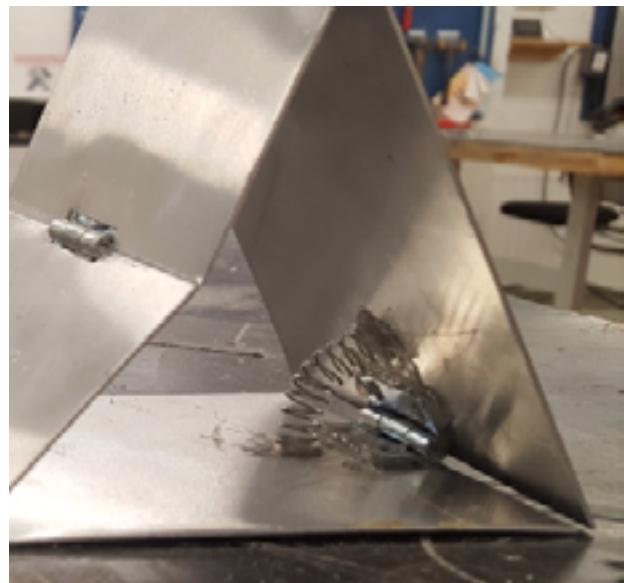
Early prototype using metal hinges to attach each sheet together. .
